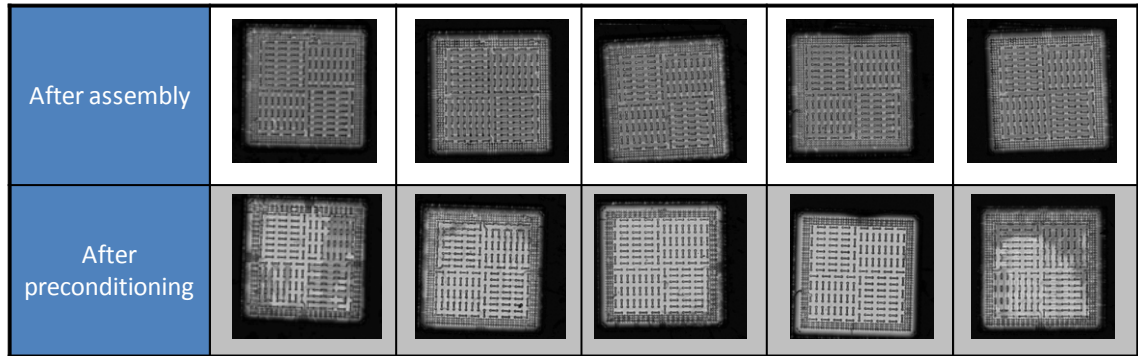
C-SAM images of BT samples after assembly and pre-conditioning
